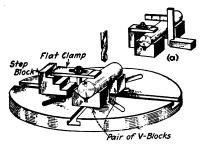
If a cylindrical piece is not too large it may be clamped in a vise; if this is inconvenient it may be clamped as shown. In either case, when setting up have the work clamped lightly with the center punch mark as nearly over the axis of the cylinder as may be judged by eye. Then, holding a square on the table and against the cylinder, roll the work until the measurement between the blade of the square and the center punch mark equals one-half the diameter of the work. Finally, tighten securely.
